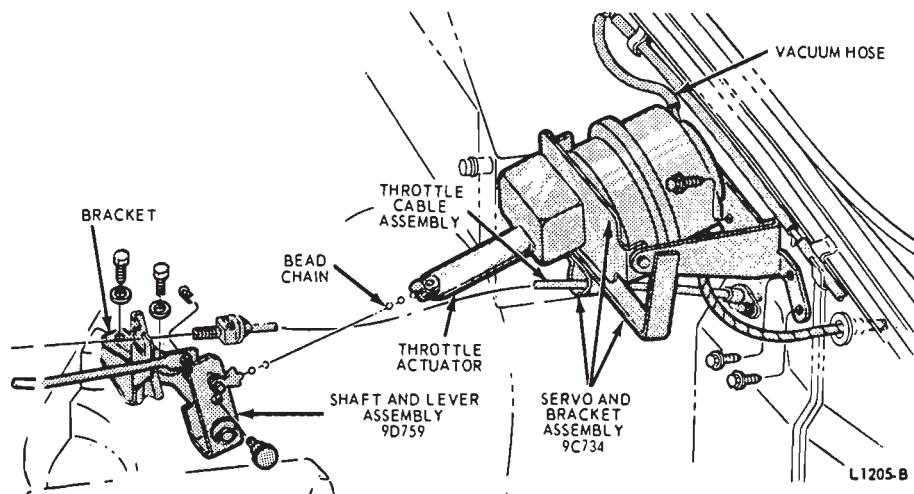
Servo Assembly (Throttle Actuator)—Thunderbird
